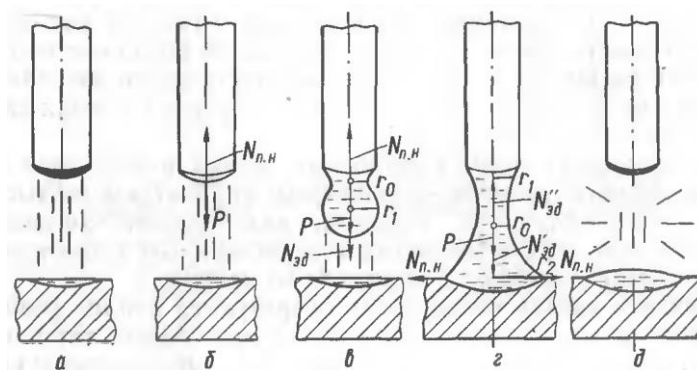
Stages of formation and transfer of liquid metal from the electrode into the weld pool
